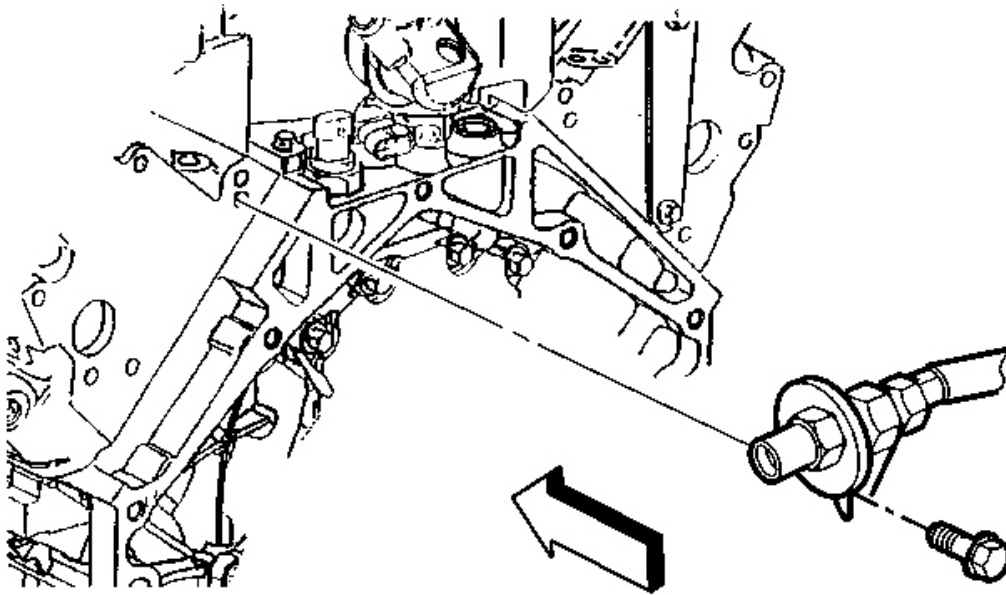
AIR Pipe, Oxygen Sensor & Bolt
